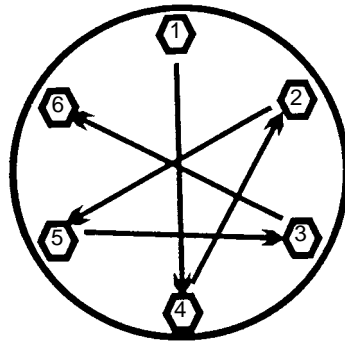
Torque Circular Bolt Patterns in a Criss-Cross Pattern
